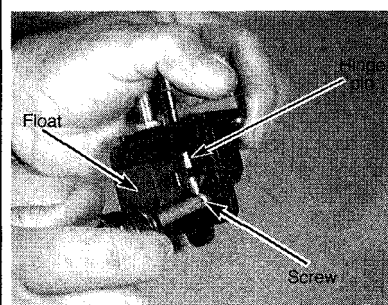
Loosen the screw and then remove the float, hinge pin, and needle valve assembly
